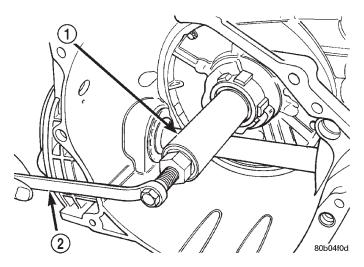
Oil Seal Removal 1 – SPECIAL TOOL C-3981B
